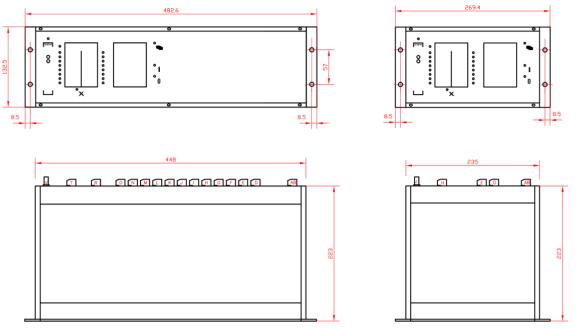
Dimensions for rack mounting of 84 HP and 42 HP single rack
